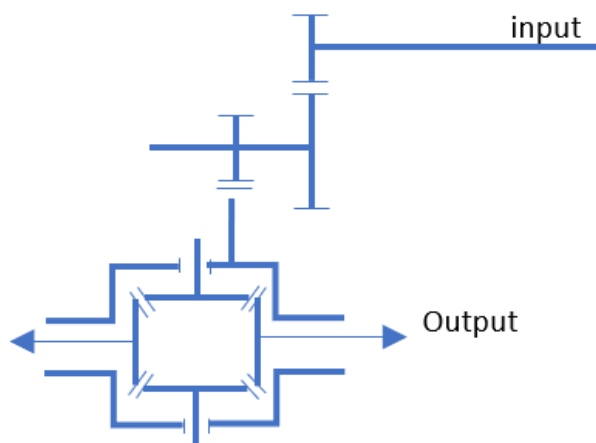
Two Stage Parallel Shaft, Layshaft Transmission
